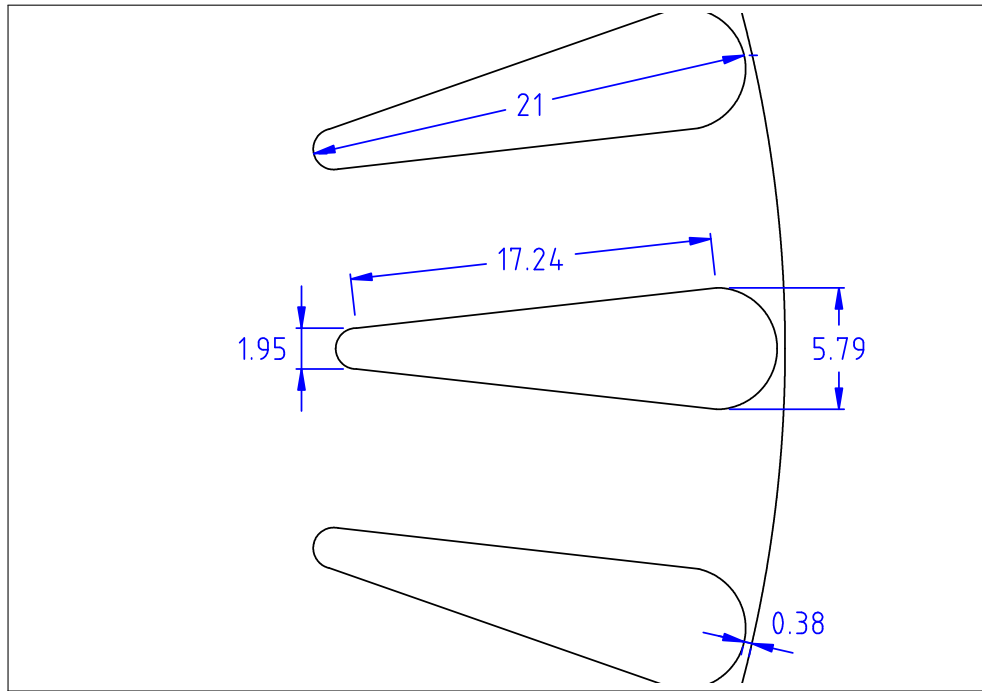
Rotor slot dimensions of the 7.5 kW industrial induction motor
